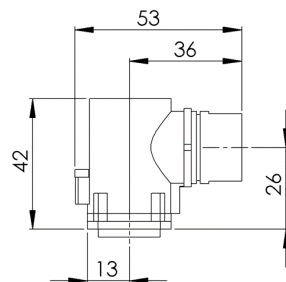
Dimensions of encoder connector ECN1325/EQN1337
